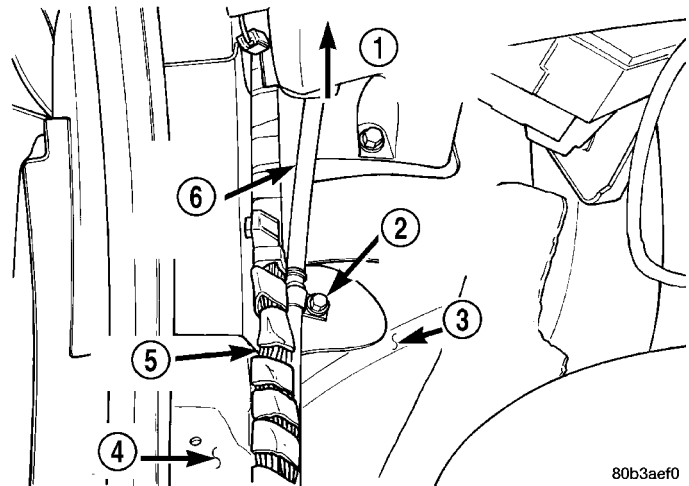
Front Park Brake Cable Attachment At Front Floor Pan
